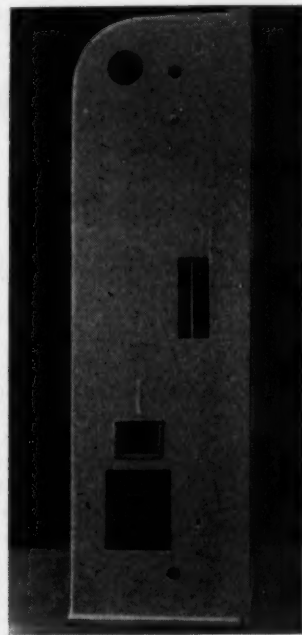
Modern streamline appearance. Component parts are cut and formed to shape before fast, simple downhand welded assembly.
